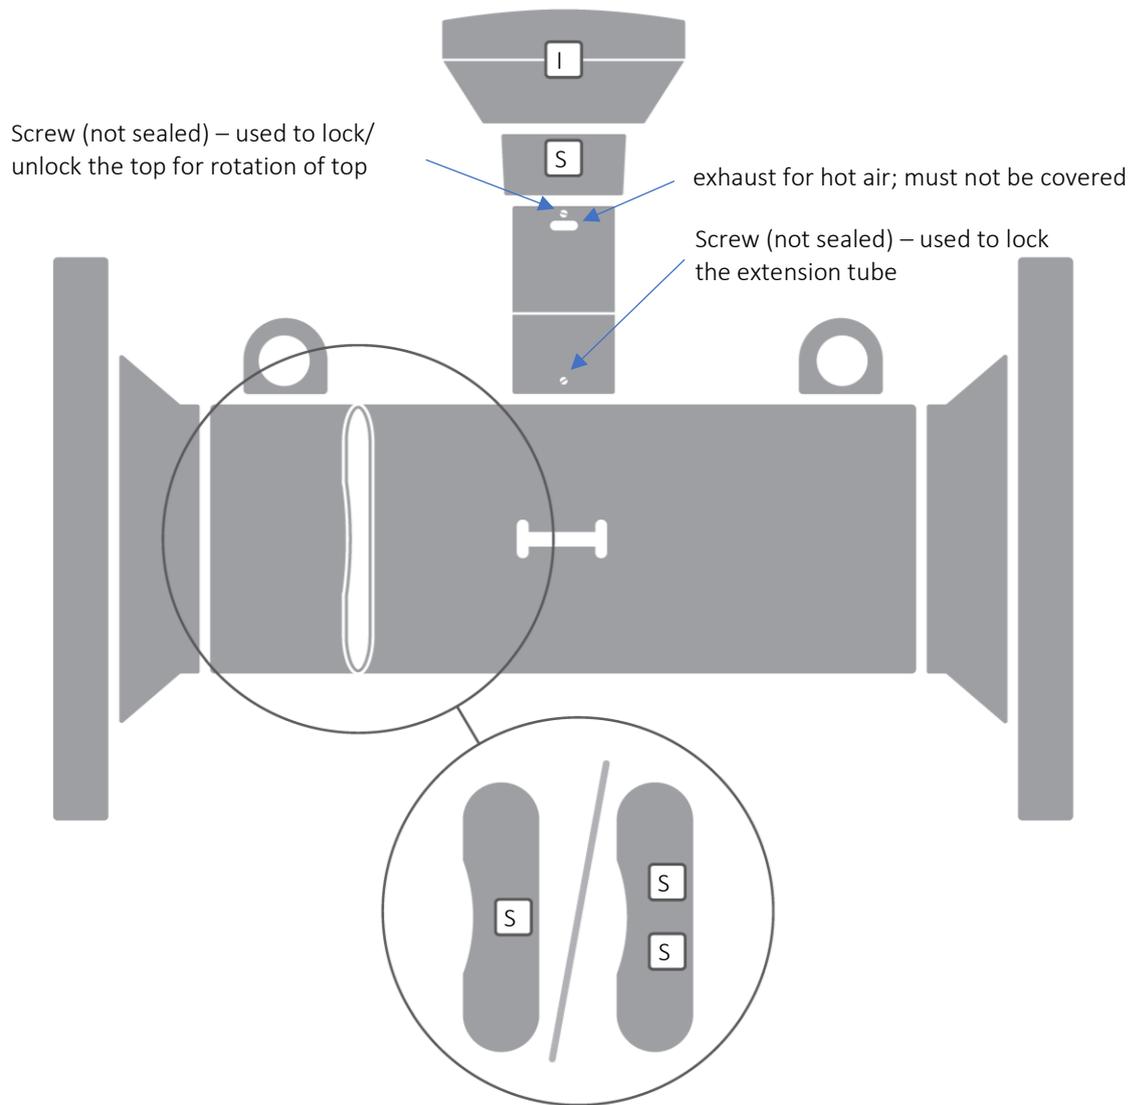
Sealing of ULTRAFLOW® 85 – Side view A.
